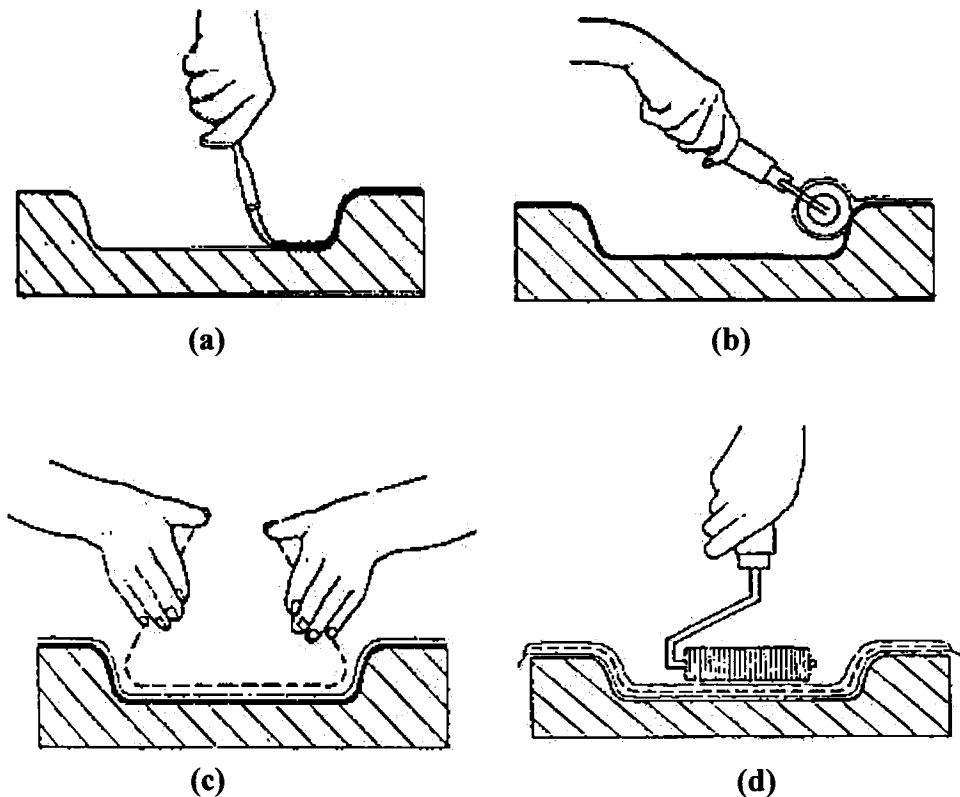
Hand lay up (a) apply gel-coat with brush (b) apply laminating resin with roller (c) cut and fit reinforcement layer (d) consolidate with ribbed roller
